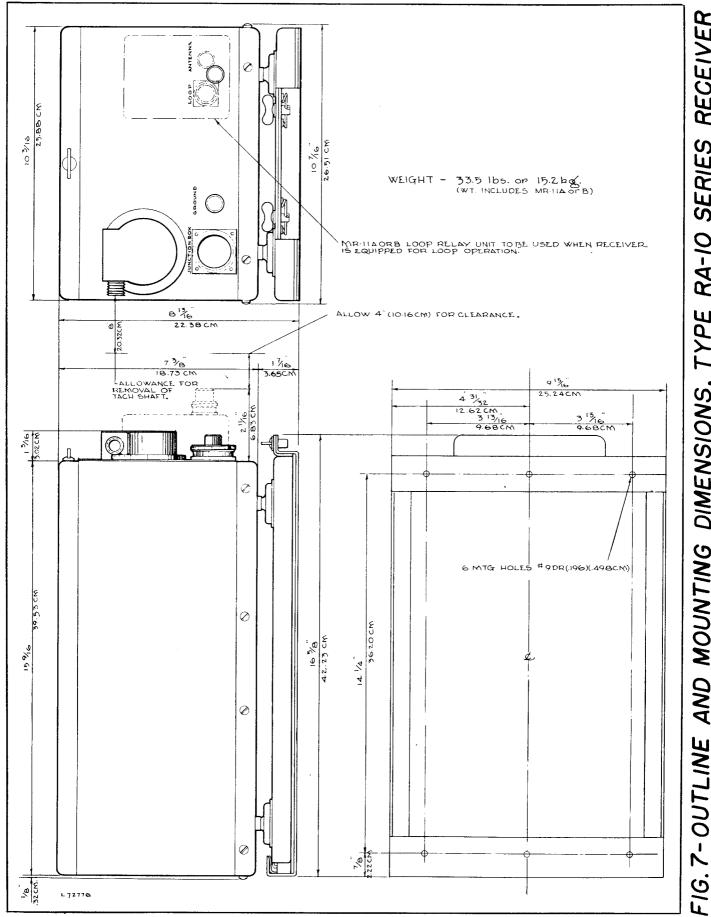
OUTLINE AND MOUNTING DIMENSIONS, TYPE RA-10 SERIES RECEIVER
